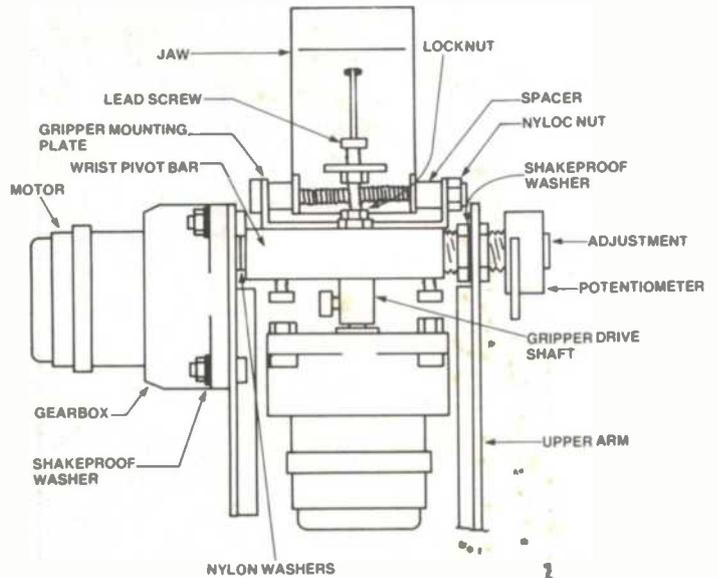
The wrist and gripper assembly, showing how the gripper fits to the wrist drive shaft.
